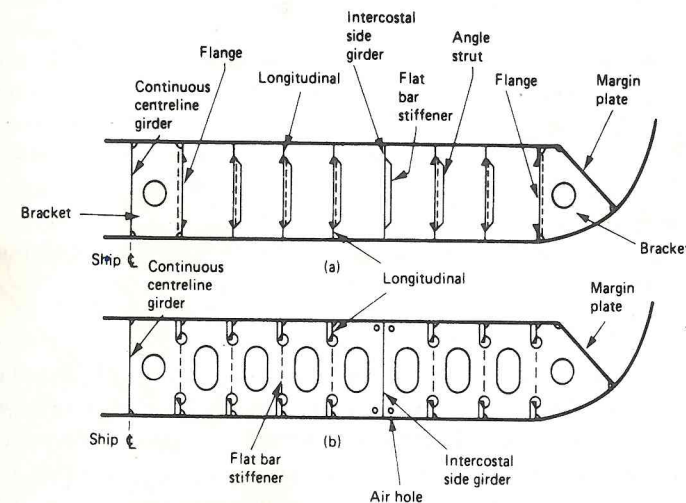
Longitudinally framed double bottom: (a) bracket floor; (b) solid floor
